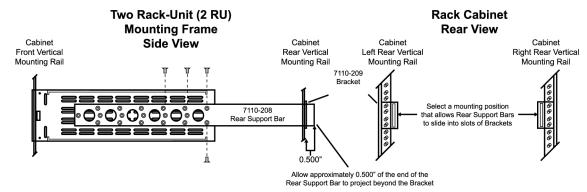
Frame Support Bracket Installation (FSB-8310)
